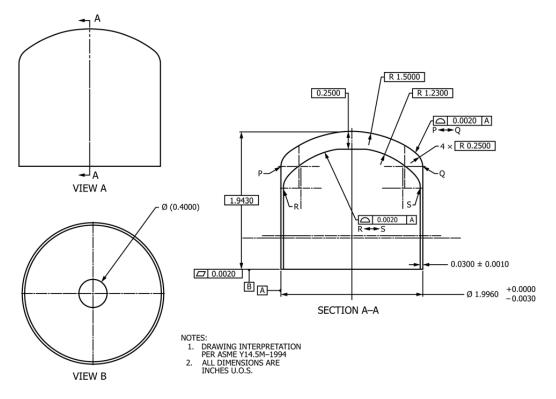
Projectile used for small panel impact testing. Material is AL2024. Projectile mass is 50 ± 0.5 g. Dimensions in inches.
